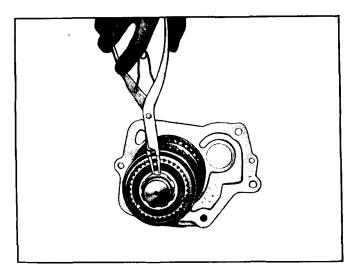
D-23 Removing 3rd & 4th Speed Synchronizer Retainer Ring
